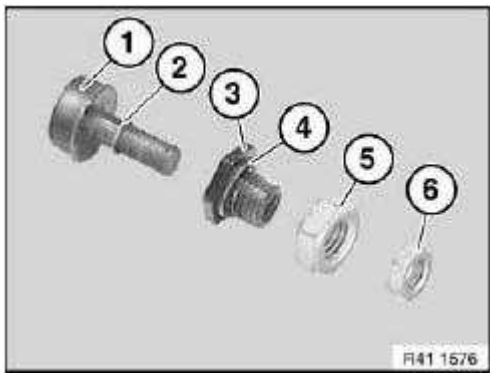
Adjustable Buffer Stop, O-Ring, Guide, Guide Nut And Lock Nut
